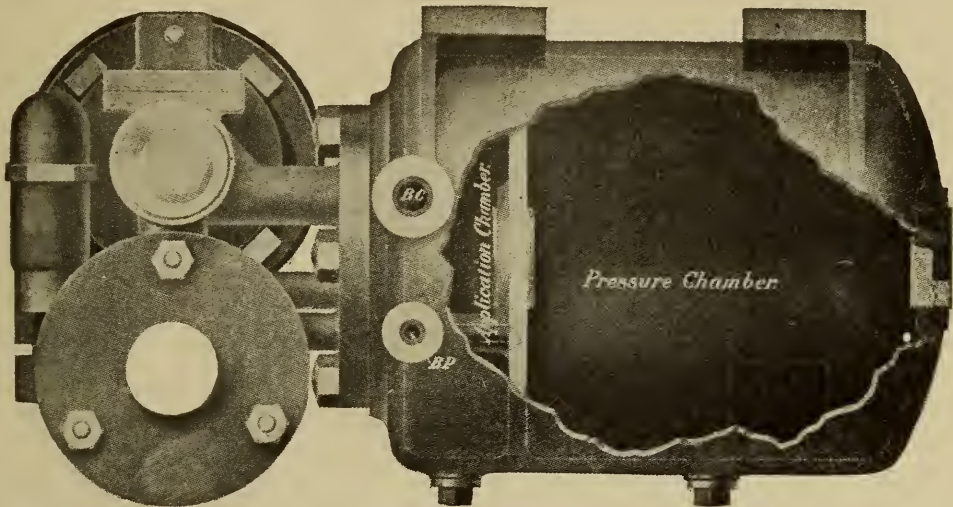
Part Sectional View of Distributing Valve and Double-Chamber Reservoir of "ET" Equipment.
